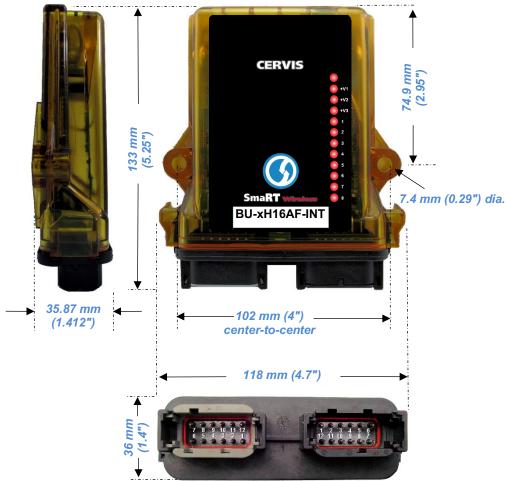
SmaRT BU-xH16AF-INT Mounting Dimensions
